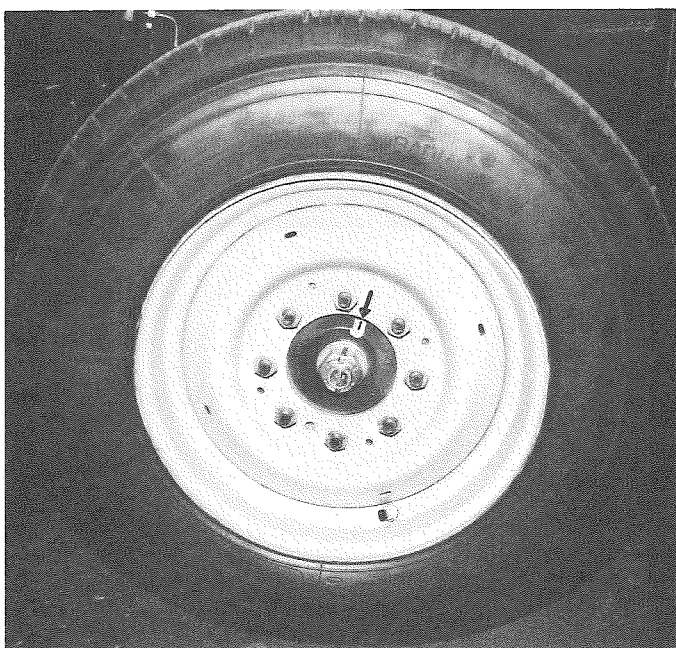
Front Wheels: Remove the front wheels and tires to gain access for the removal of the wheel liners. Be sure to mark the wheel and hub before removing so they will remain in balance after re-installation. Also, be sure to mark the wheels as to either right or left.
